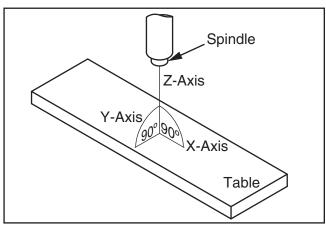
Spindle Z-axis perpendicular to the table X- and Y-axis.
